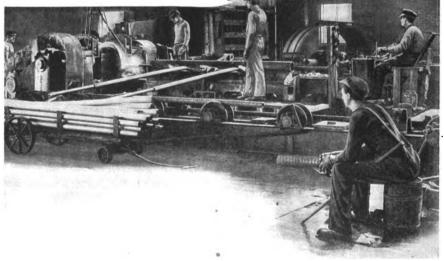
PIERCED BILLET COMING OUT FROM DISKS OVER MANDREL ROD
